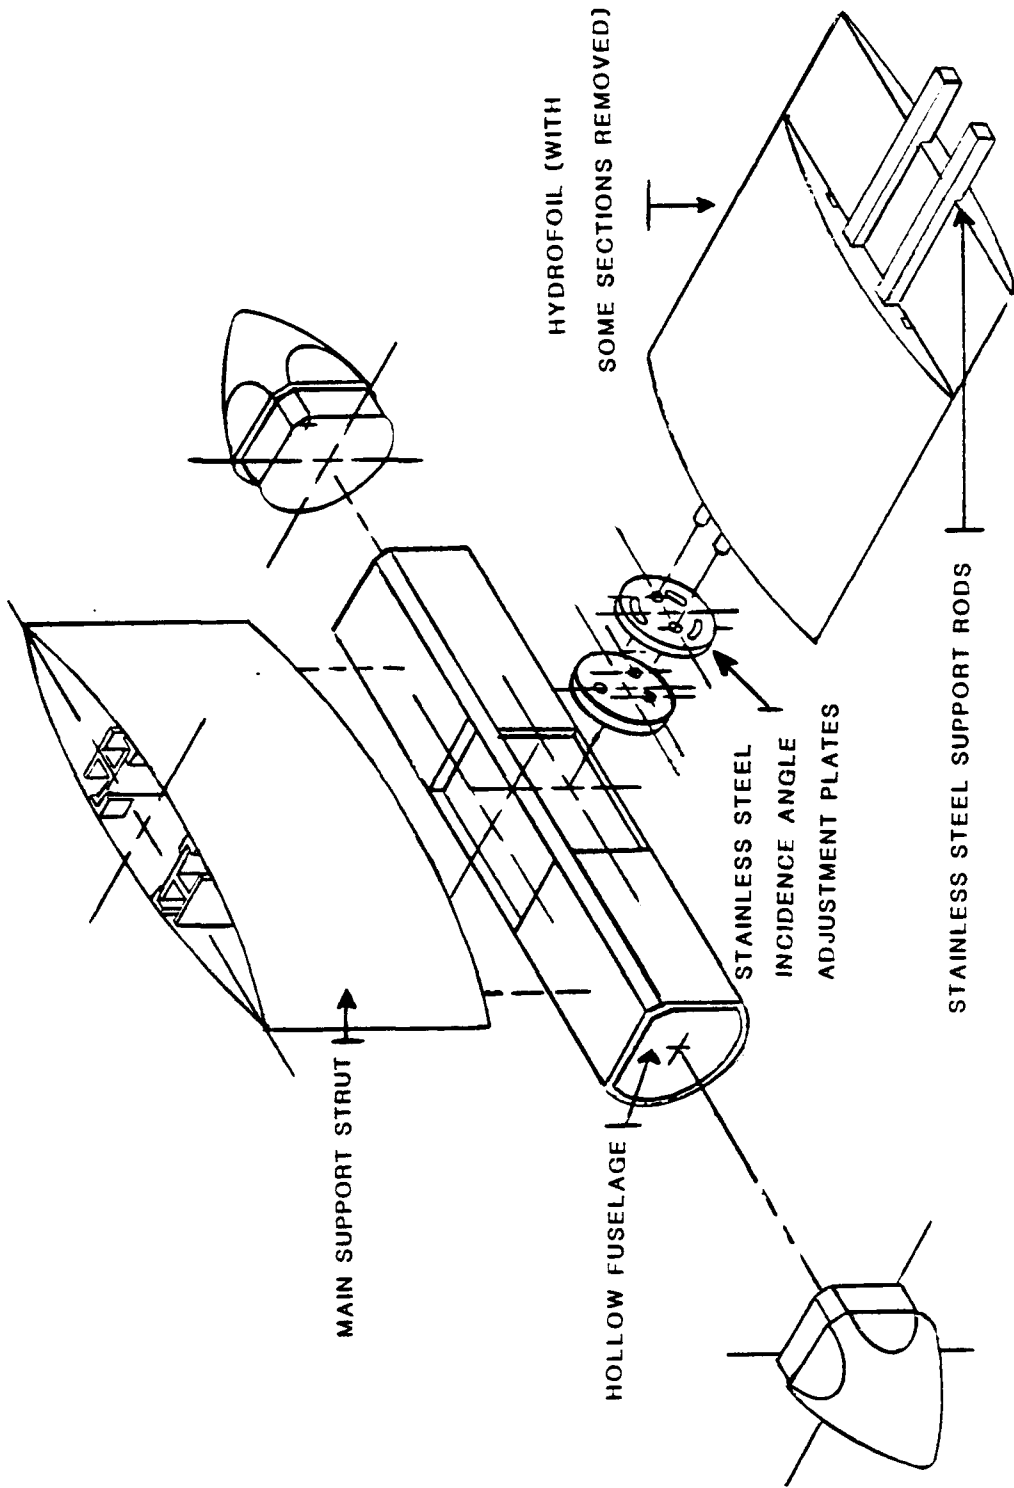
A three dimensional drawing of the hydrofoil and mounting system.
